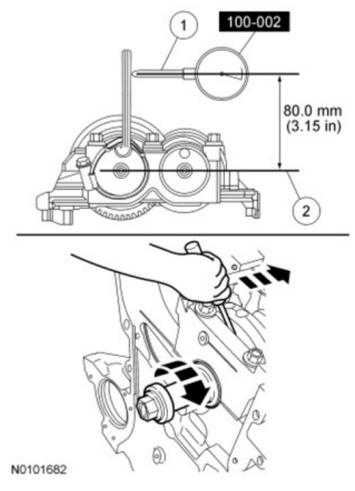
Measuring Gear Backlash Using Dial Indicator Gauge With Holding Fixture Courtesy of FORD MOTOR CO.
